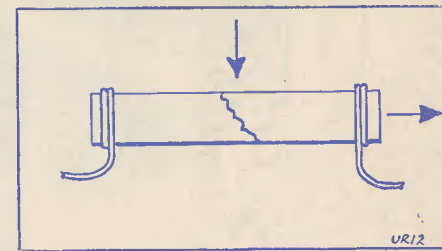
A fracture in a carbon resistor may be detected by gentle pressure
